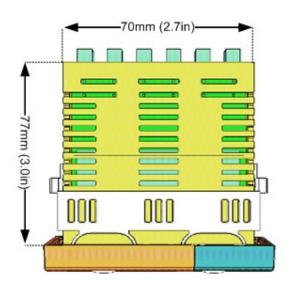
FX06 Controller and Panel Cut-Out Dimensions
